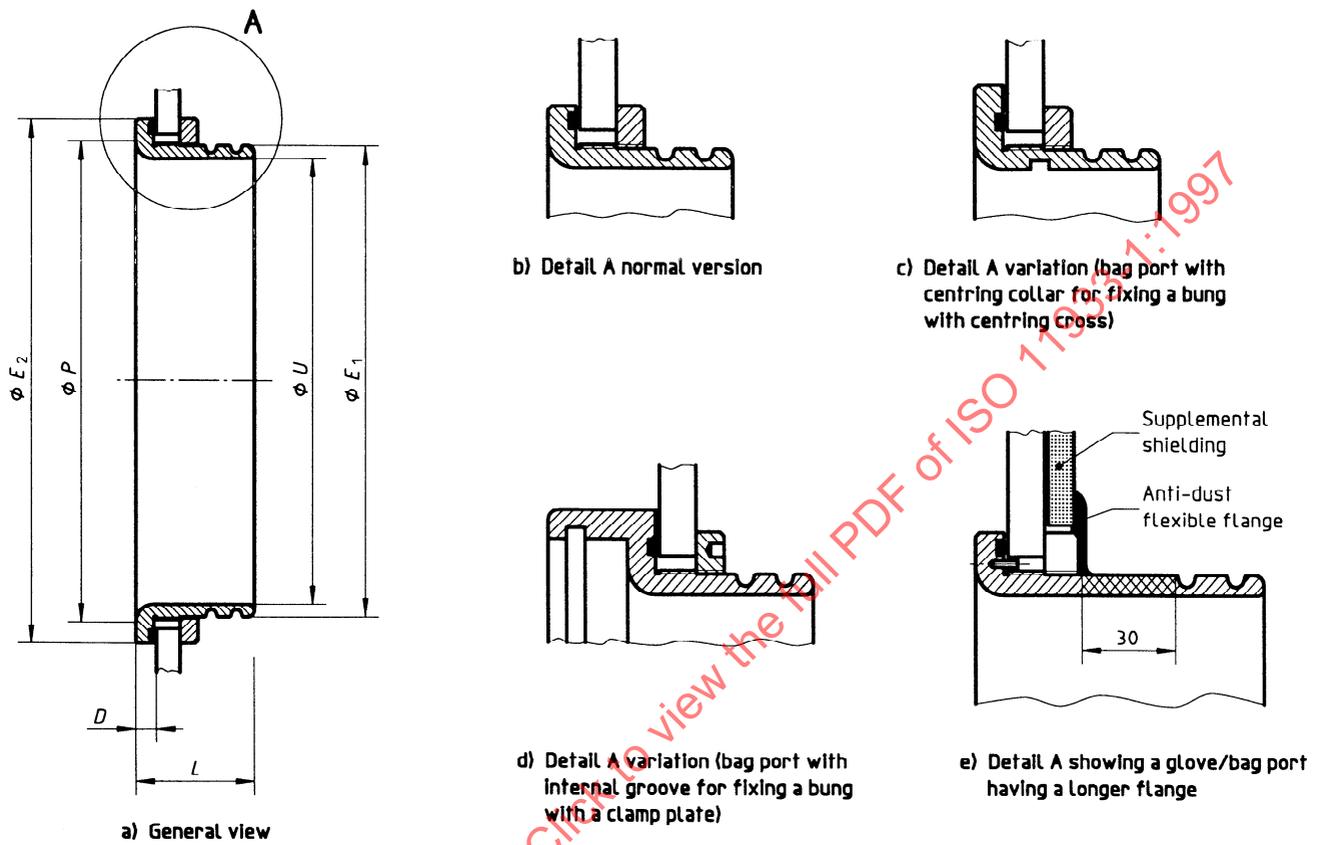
Examples and dimensions of threaded glove/bag ports having two external grooves
